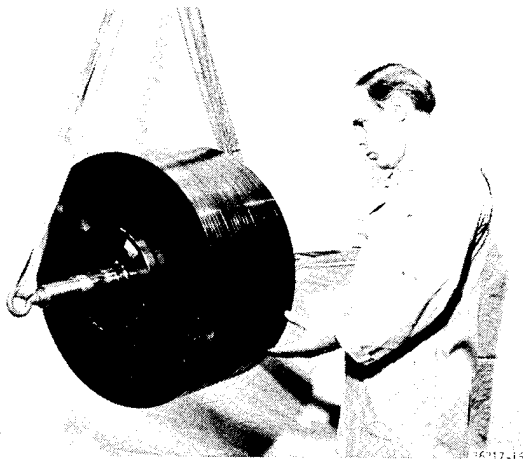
ACT-1 multiple thin-disc flywheel assembly.
